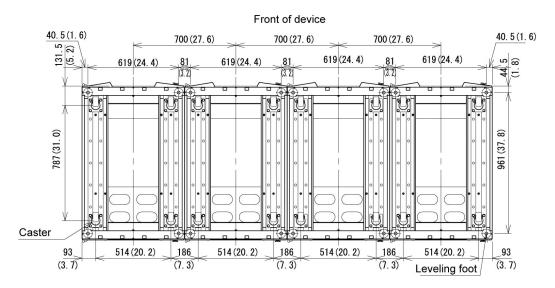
Bottom view drawing of connected 19-inch racks (standard)
